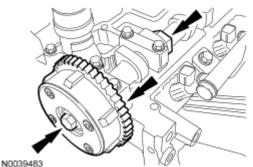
Locating Intake Camshaft Phaser And Sprocket Bolt Courtesy of FORD MOTOR CO.
